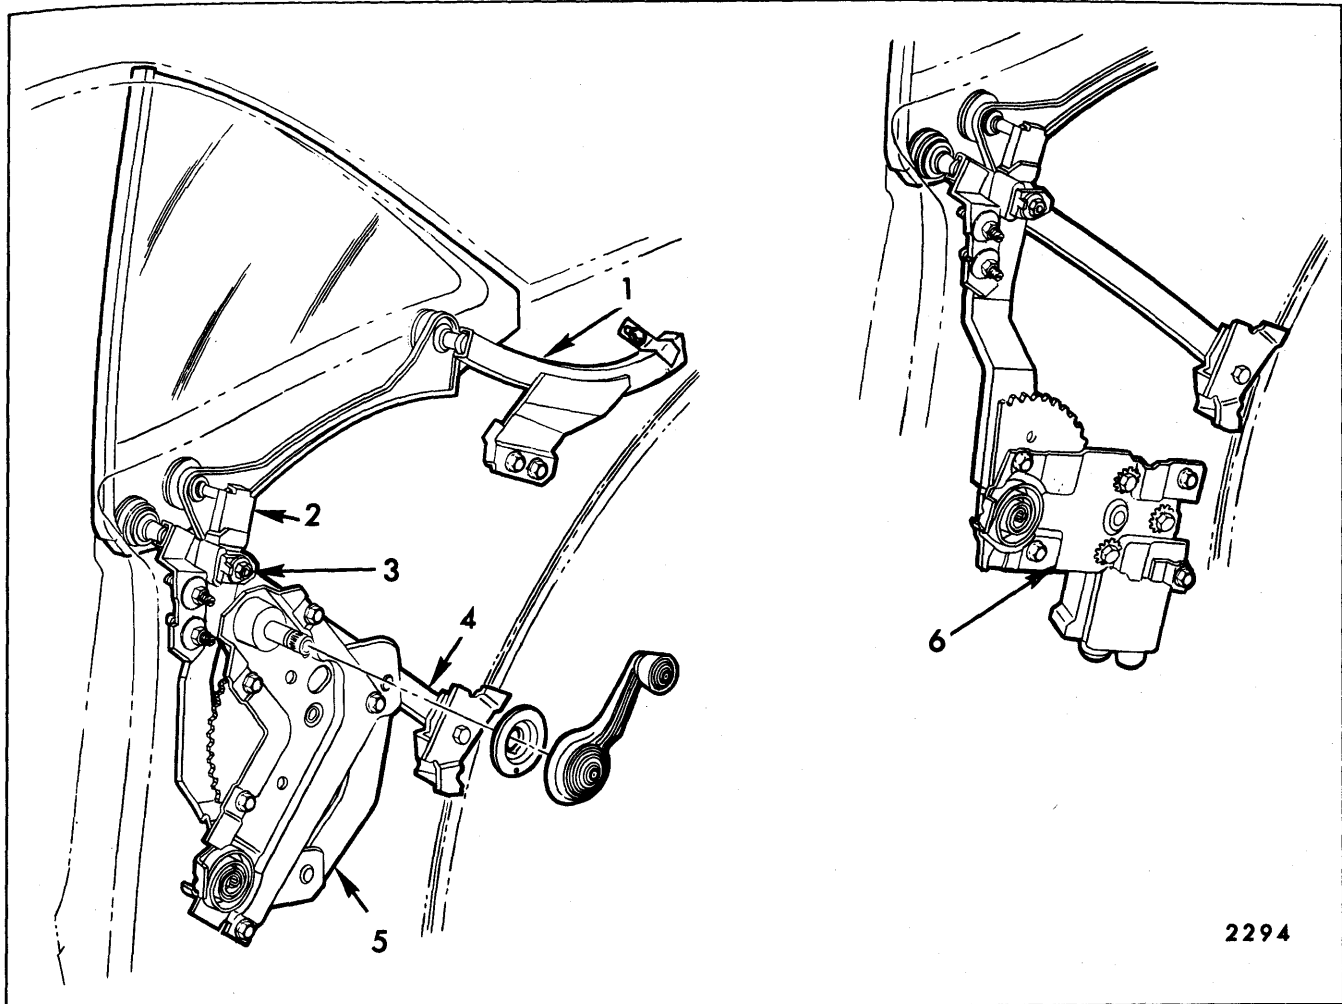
Rear Quarter Hardware - Oldsmobile "E" Body
